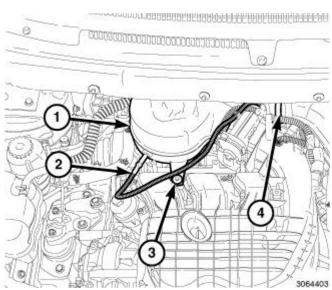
EGR Cooler Coolant Tube & Bolts Courtesy of CHRYSLER GROUP, LLC
